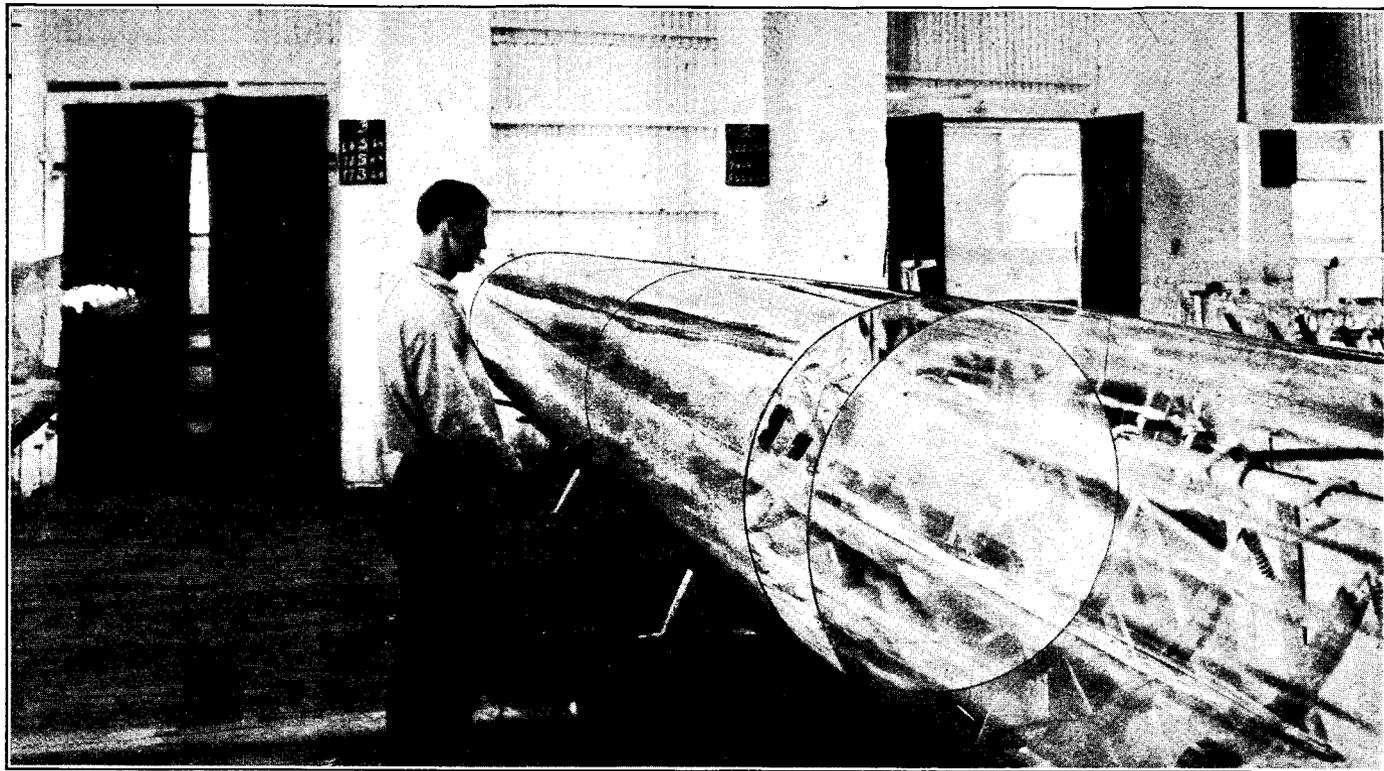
CYLINDER MACHINE PROCESS: CAPPING A LARGE CYLINDER INTO SMALLER SECTIONS
